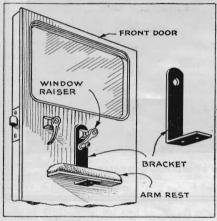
A sheet iron bracket with padded wooden strip hooks on door to form driver's arm rest.
